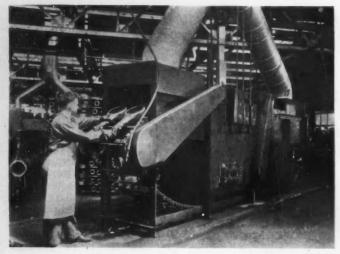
AUTOMATIC MACHINE WASHING AXLE-HOUSINGS
